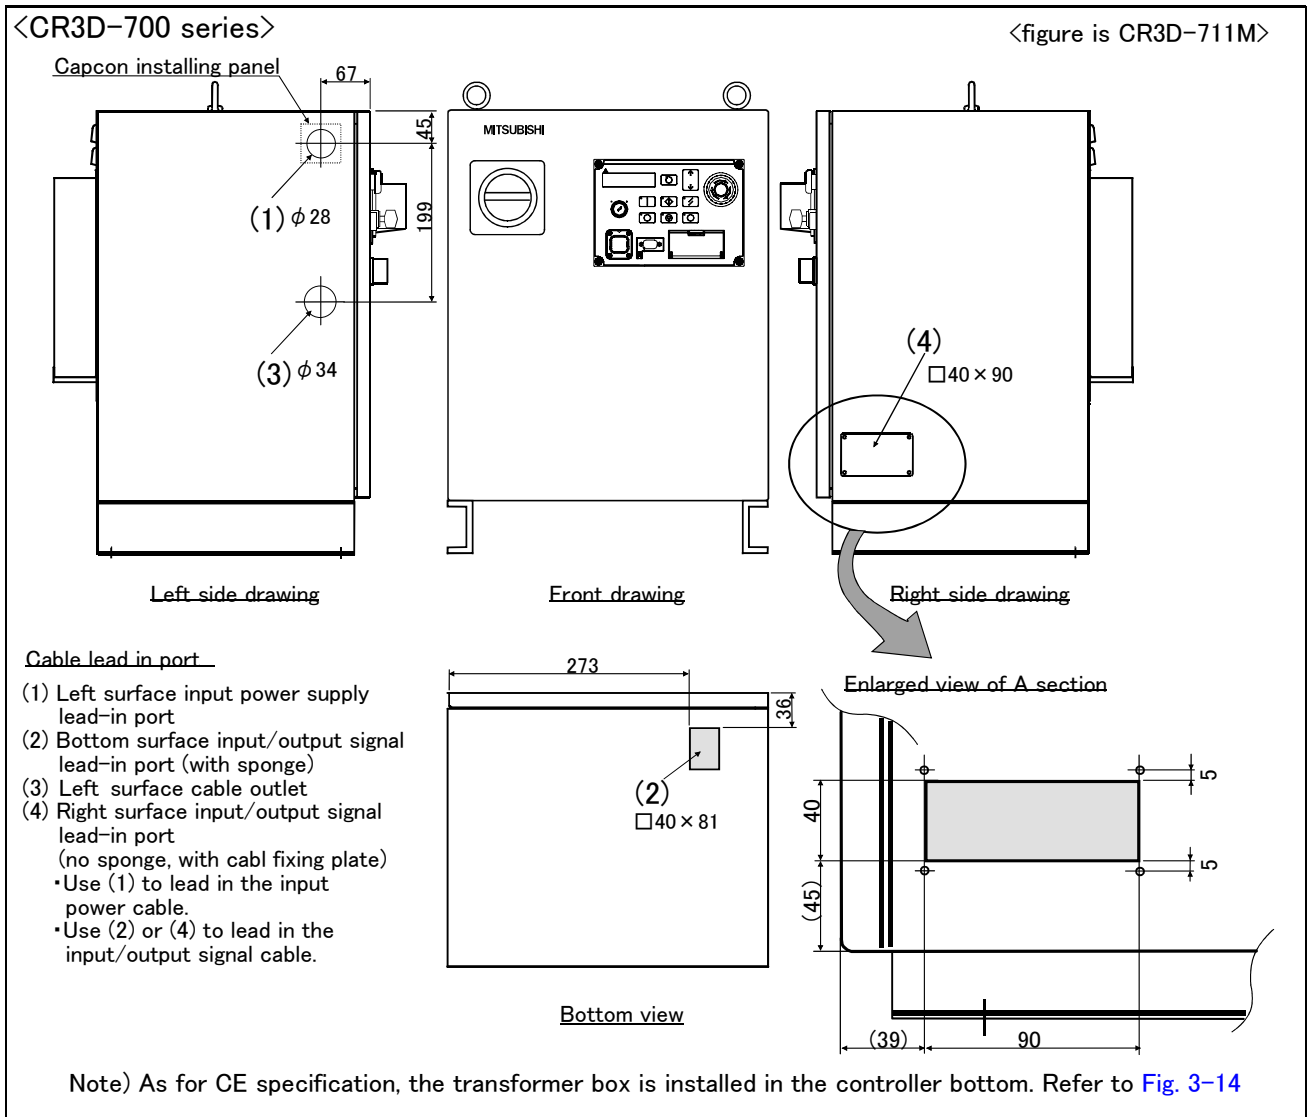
Cable lead-in and dimension of the controller (CR3D-700 Series)
